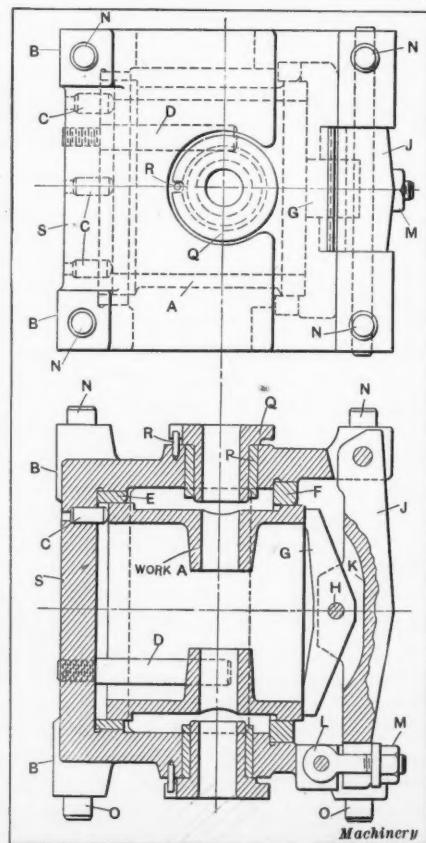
Jig with Interchangeable Bushings for Different Tools used in machining Cylindrical Part A
